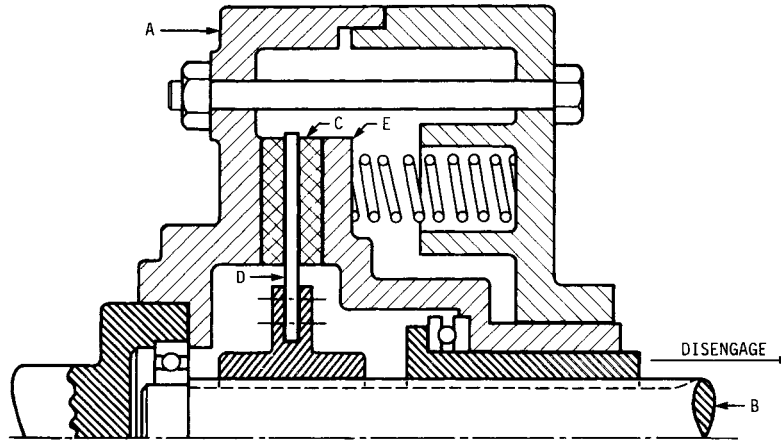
Schematic drawing of an axial clutch; *A*, driving member; *B*, driven shaft; *C*, friction plates; *D*, driven plate; *E*, pressure plate.
